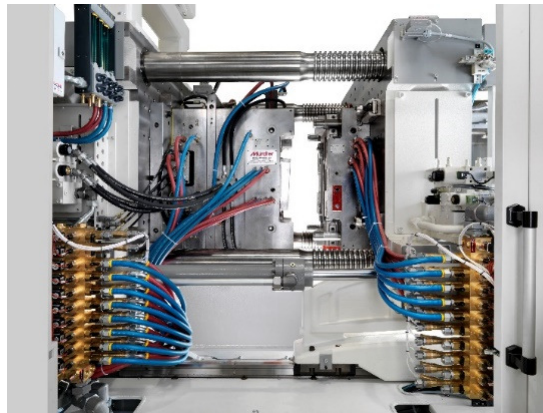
Mould trail in injection machine (Maffei, 2013)
